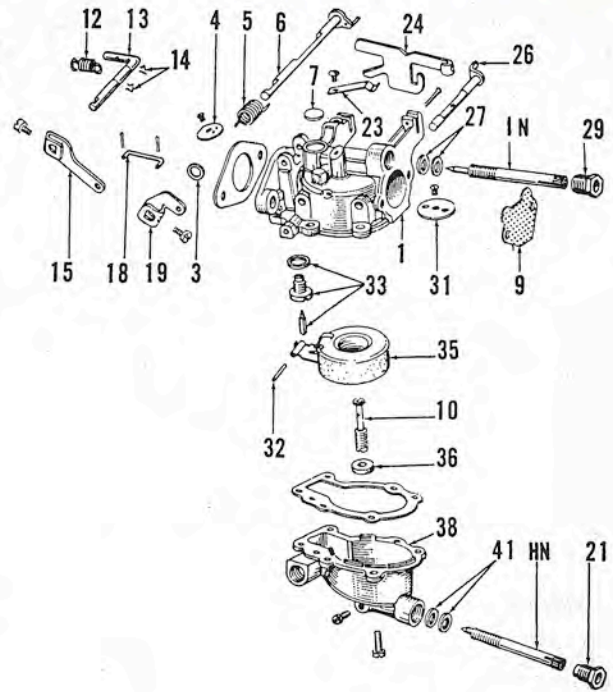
Exploded view of CD-16 and CD-17 carburetor, silencer and reed valve assembly. Earlier models are similar.
